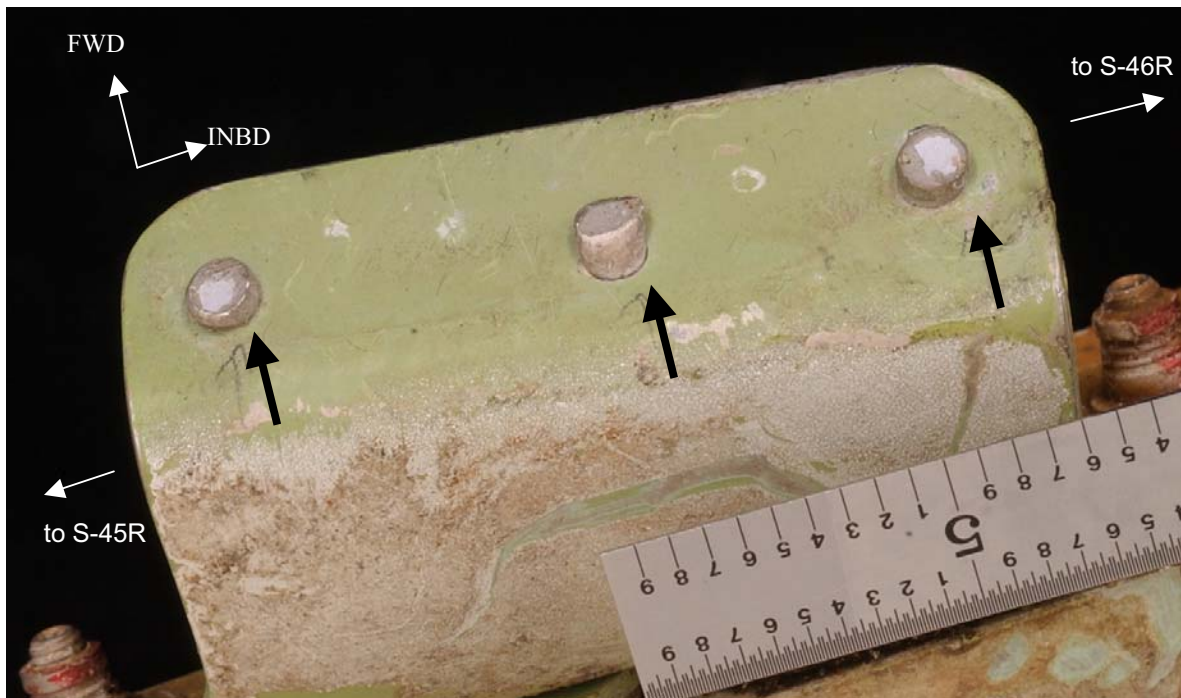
Skin flange rivet fractures at shear tie between S-45R and S-46R of the STA 2040 frame. Black arrows indicate the direction of loading.
